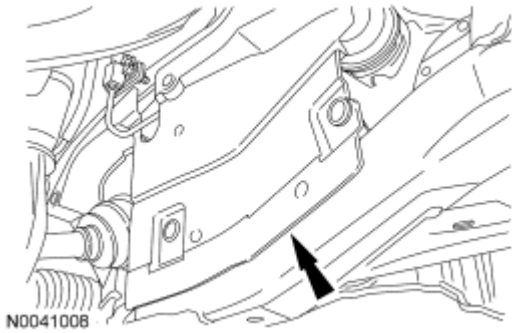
Locating Transaxle Support Insulator Bracket Nuts & Bolt
